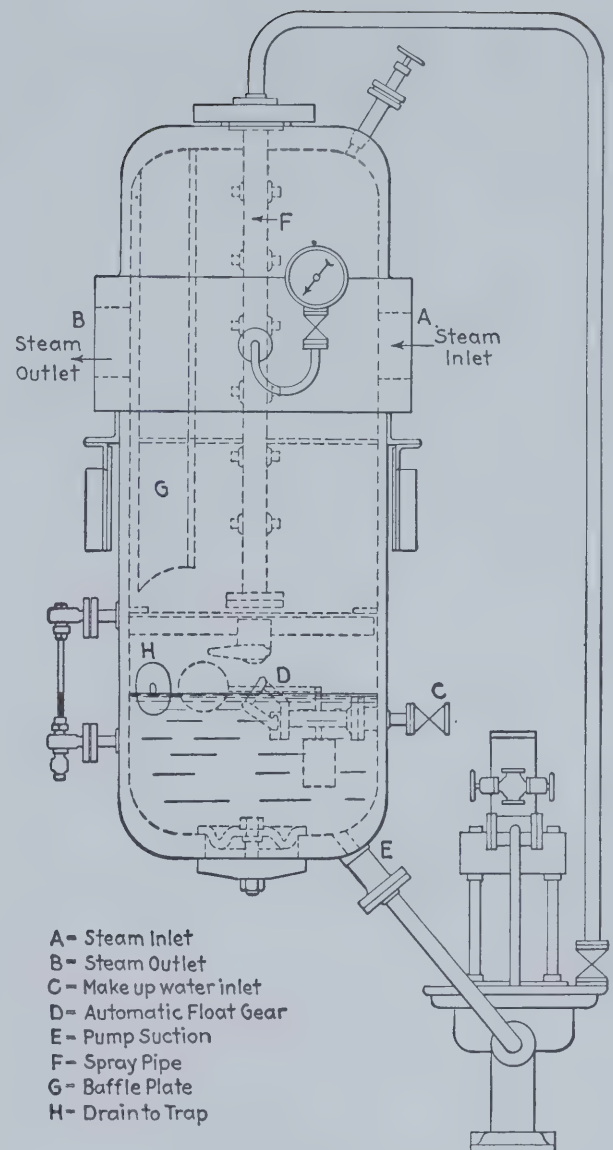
Spray-type desuperheater for supplying auxiliary steam
